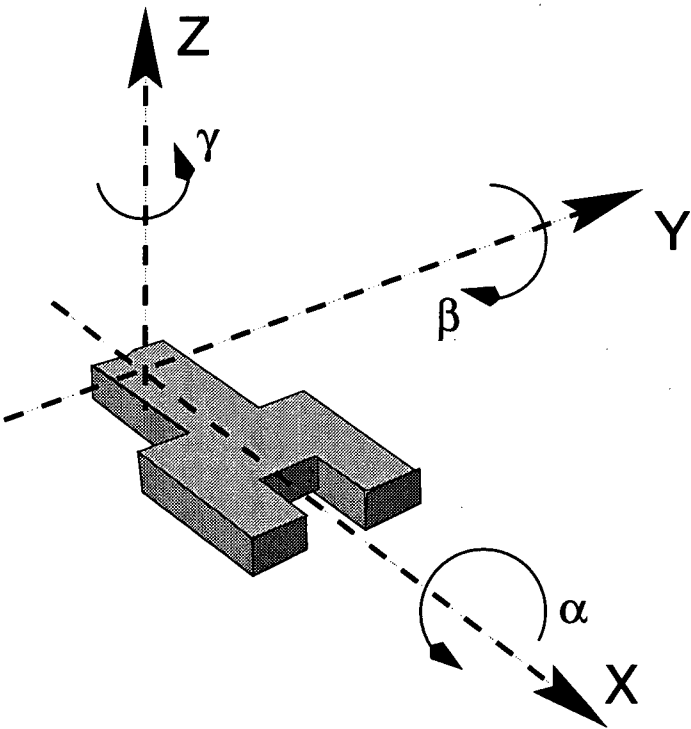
Roll (α), pitch (β) and yaw (γ) of a robot tool piece.
